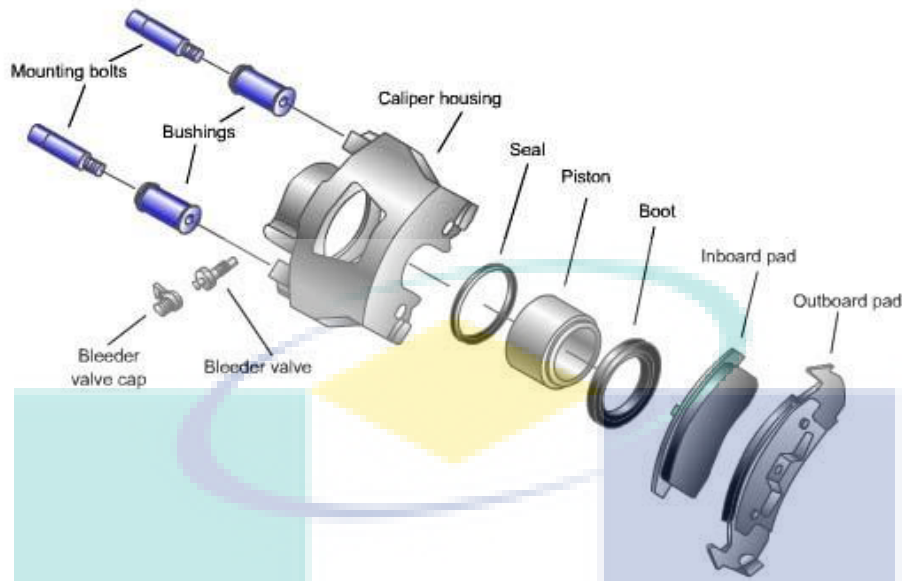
16 Floating Calliper on Mounting Bolts and Bushings
